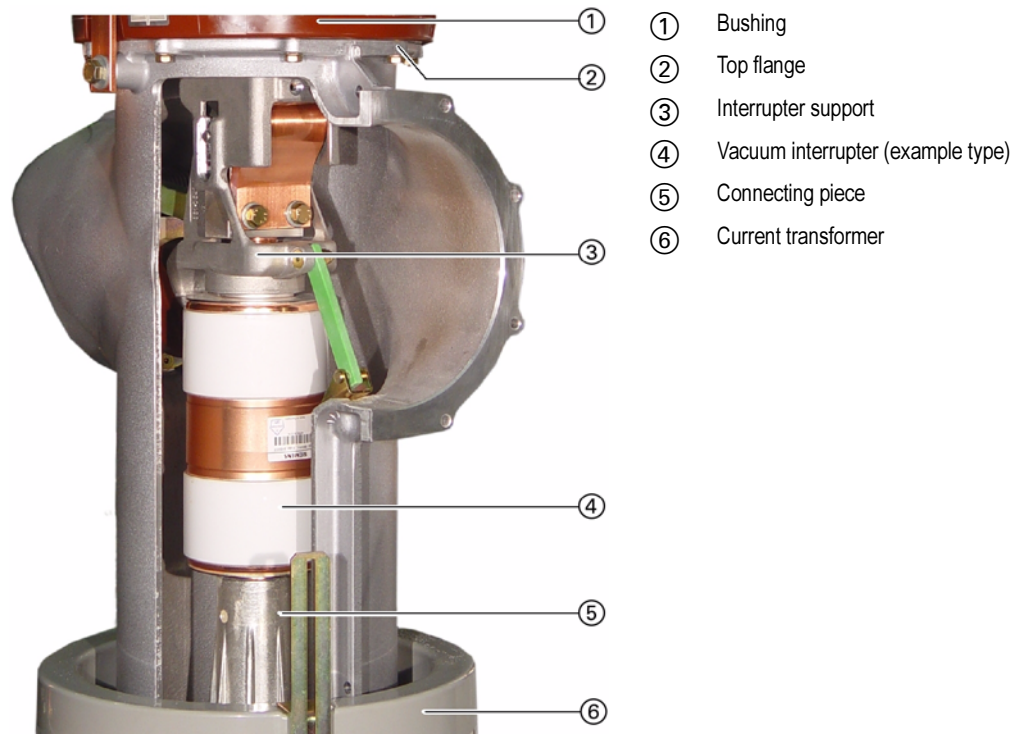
Sectional view of switchpanel pole with vacuum interrupter
